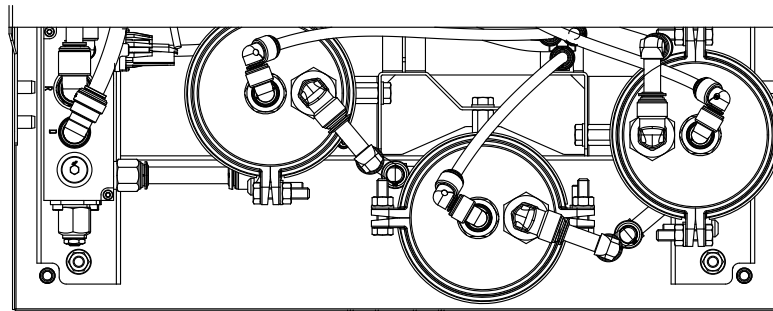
Alignment of the membrane tube cover RO-E 300(+) without pressure gauge, view from above
